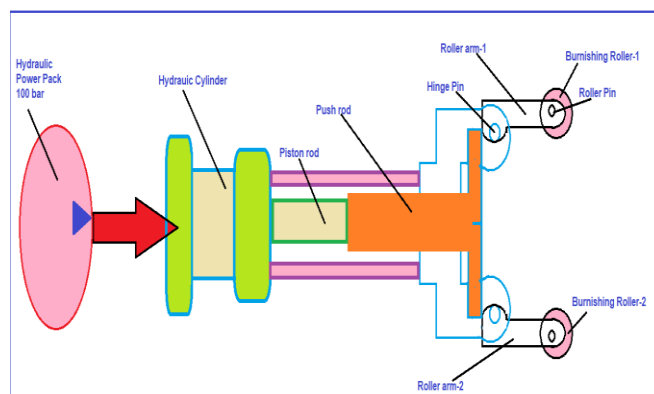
Schematic of Hydraulic Operated Twin Roller Tool Head for Roller Burnishing
